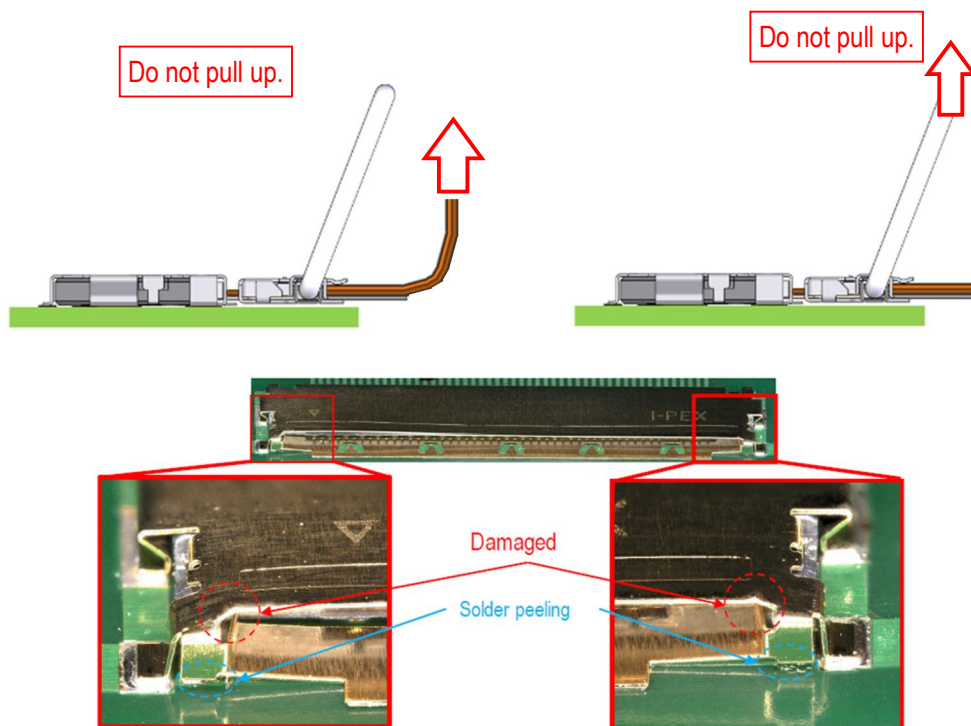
Prohibition of FPC and Lock Bar Assembly Handling
